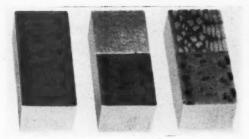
Samples of hardened tool steel that were burned severely when ground lengthwise. Part of the burned surface was removed from the piece in the center by gentle grinding, leaving the upper half apparently unburned. The piece at the right has been similarly cleaned off, but then it was etched in nital and the rehardened areas showed up as white spots while the adjacent softened areas become dark.
